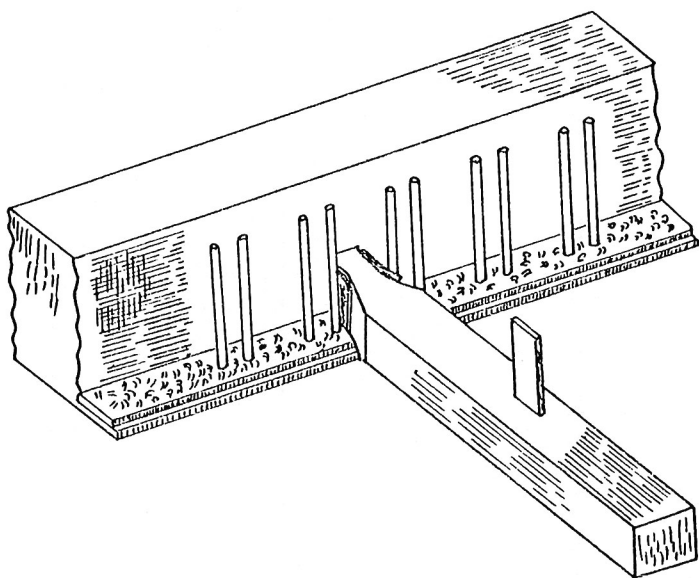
Drawing illustrating Thon's second type of key-guiding mechanism.
